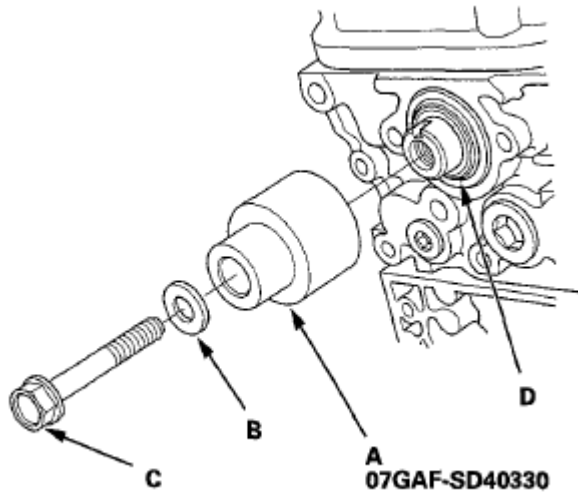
Identifying Camshaft Oil Seal & Bolt
